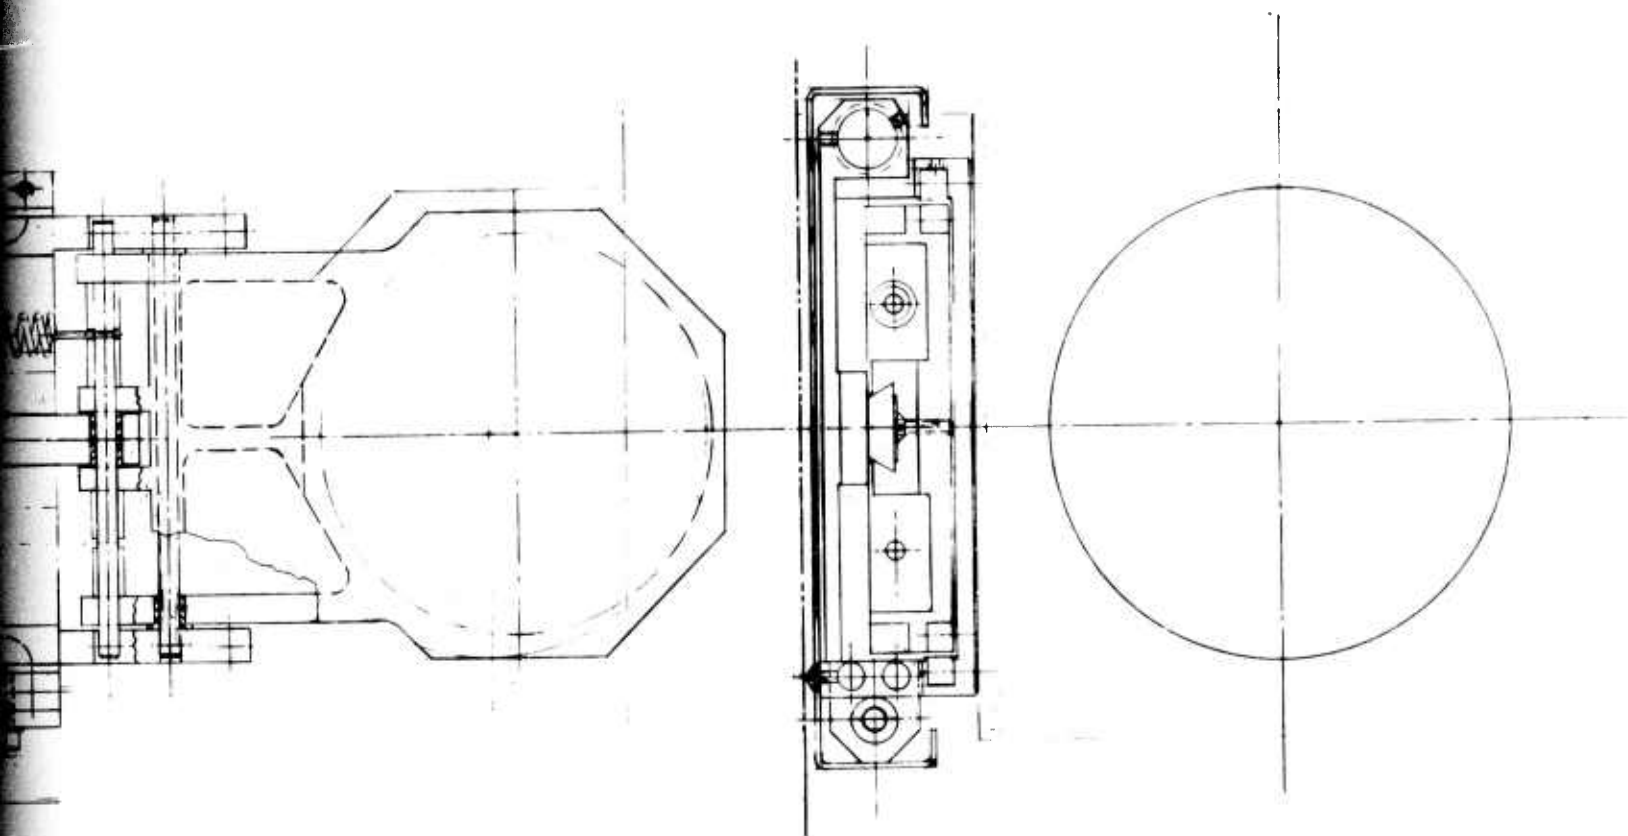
2X Adapter Lens (Alternate A) Mechanism Layout (Drawing #721517)
